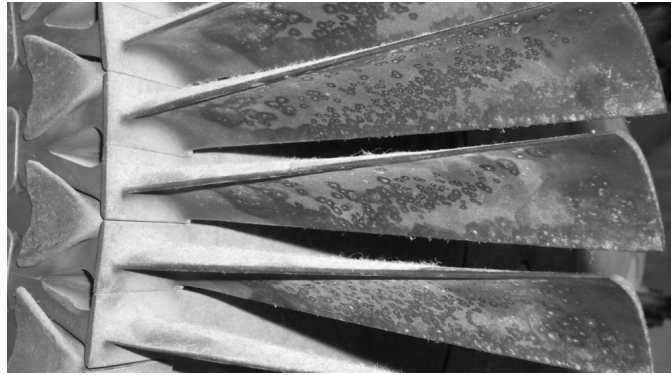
GE J-79 turbojet engine turbine blades [57]
